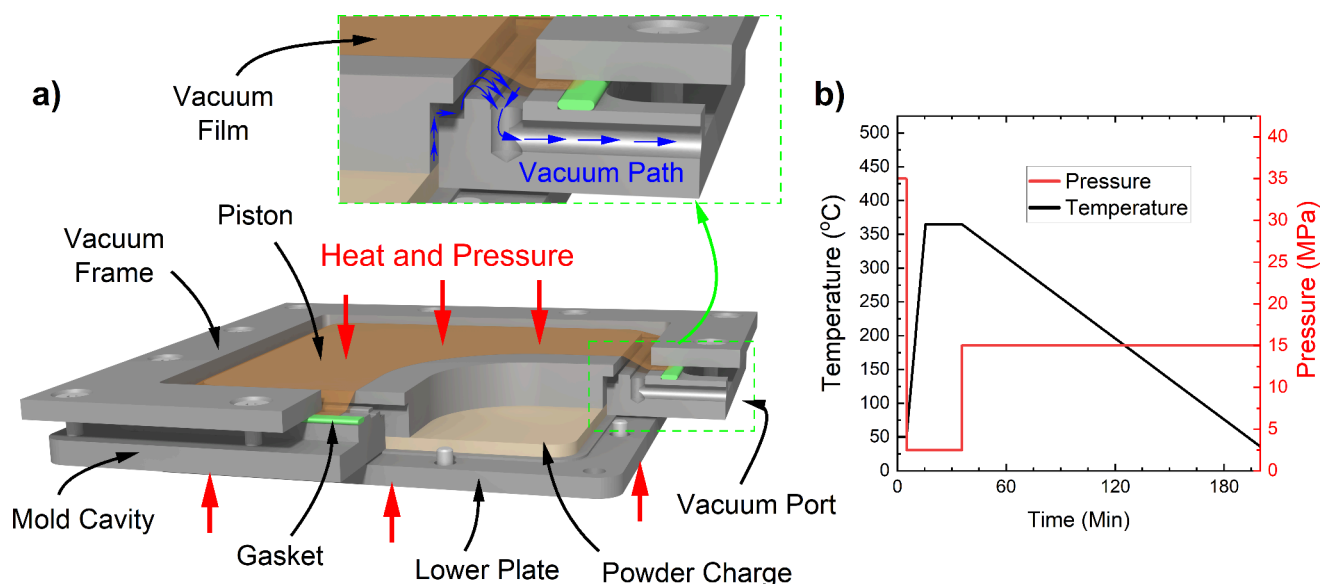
(a) Cross-sectional schematic view of the vacuum-assisted compression mold. Powders are loaded into the center of the mold before inserting the piston and then sealing with the vacuum film. The entire mold is placed in the hot press, where force is directly applied to the piston surface and lower plate during consolidation. (b) Consolidation cycle of the composite panels, indicating processing pressures and temperatures.
